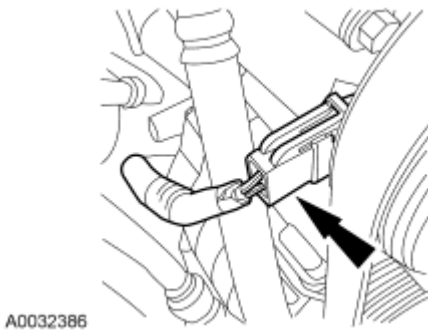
Locating Engine-To-Coolant Reservoir Bypass Hose
